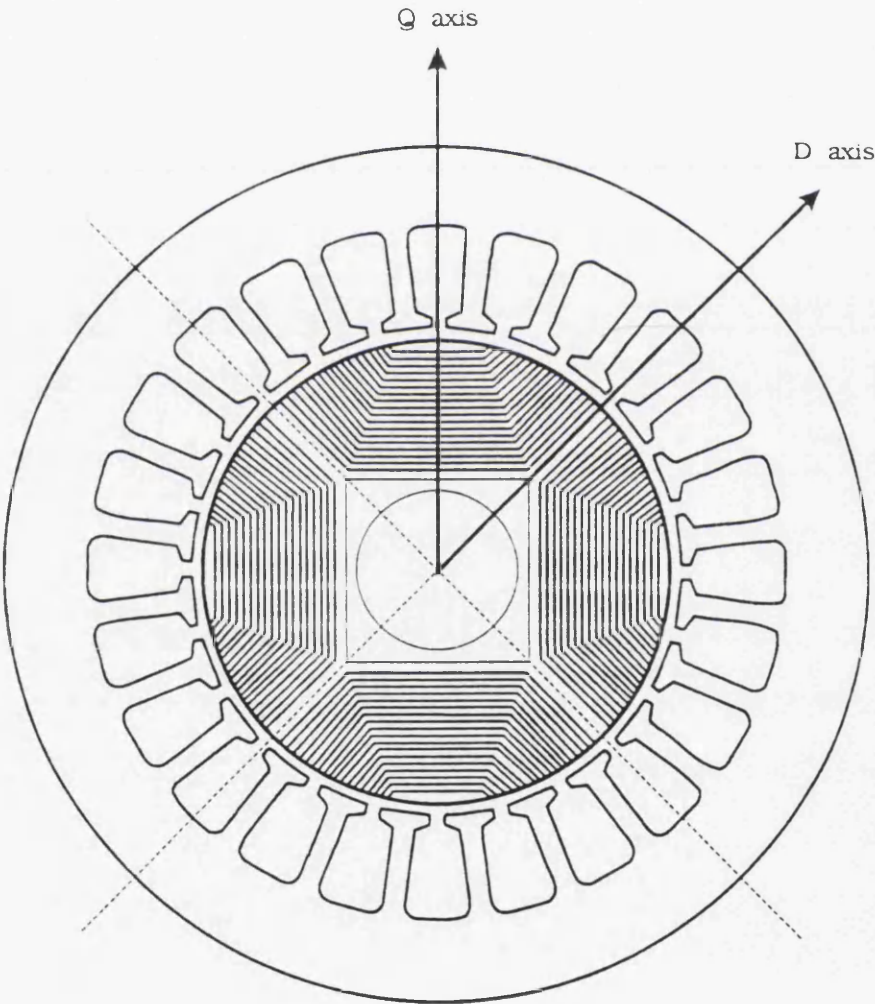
Cross-section of synchronous reluctance machine with axially laminated rotor
